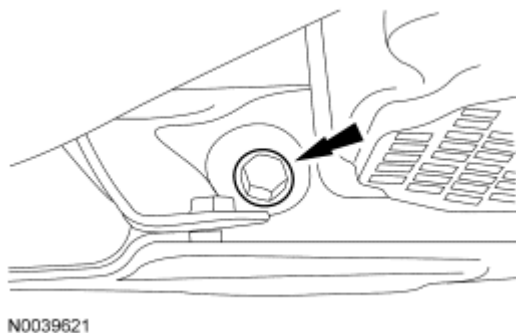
Locating Lower Control Arm-To-Subframe Bolt
